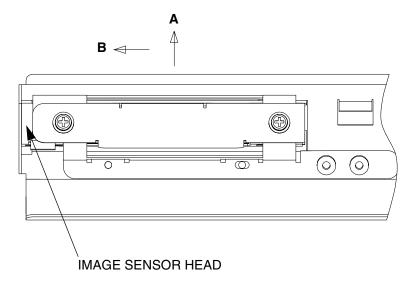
Removal of the H.POS. Sensor (Image Sensor Head) :For Rear Engine
